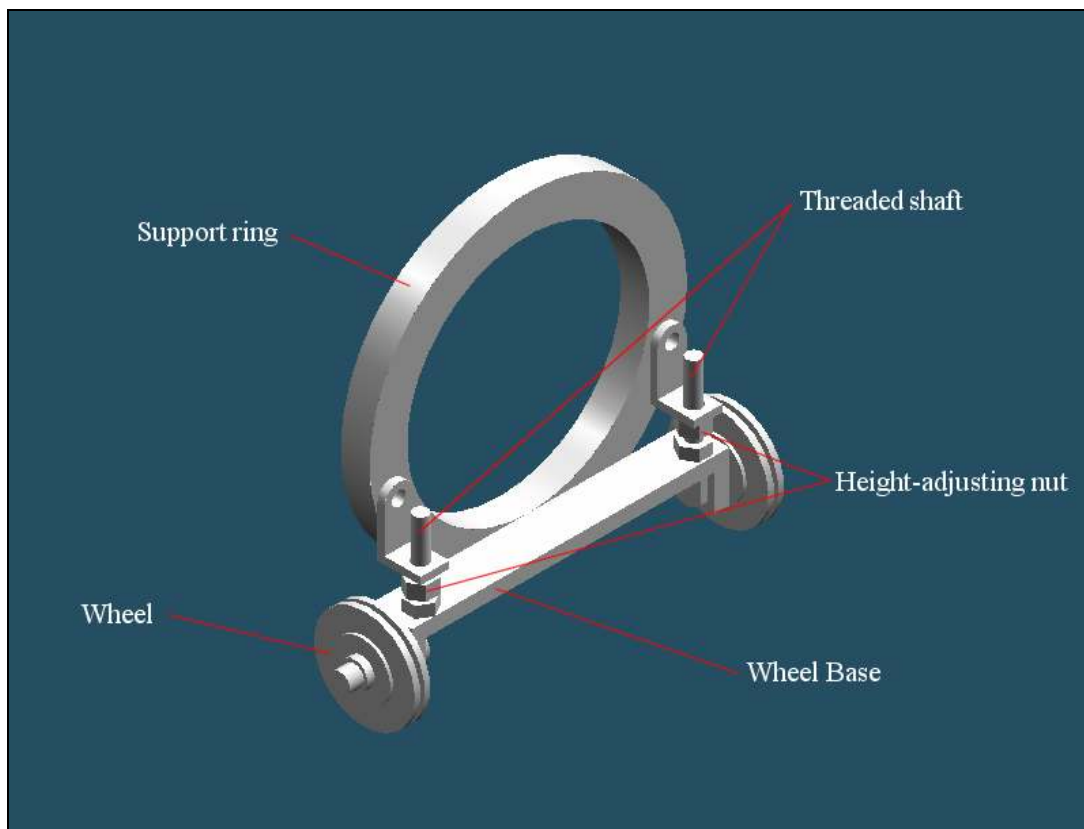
Solid Edge © isometric view showing support ring of driver with wheel support
